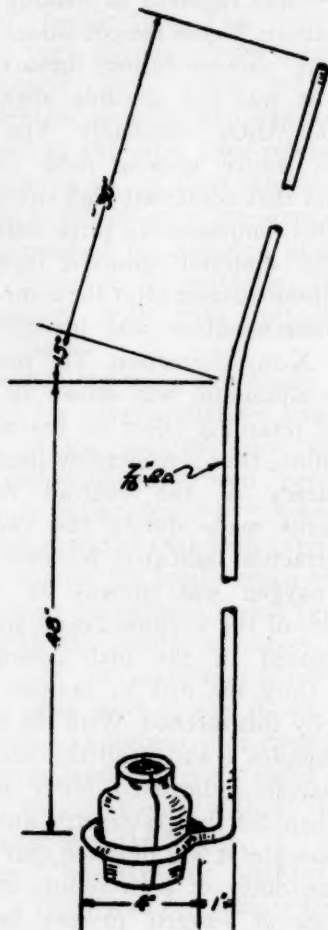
ARRANGEMENT OF HANDLE AND BOMB USED FOR SAMPLING LIQUID STEEL IN INGOT MOLD.
